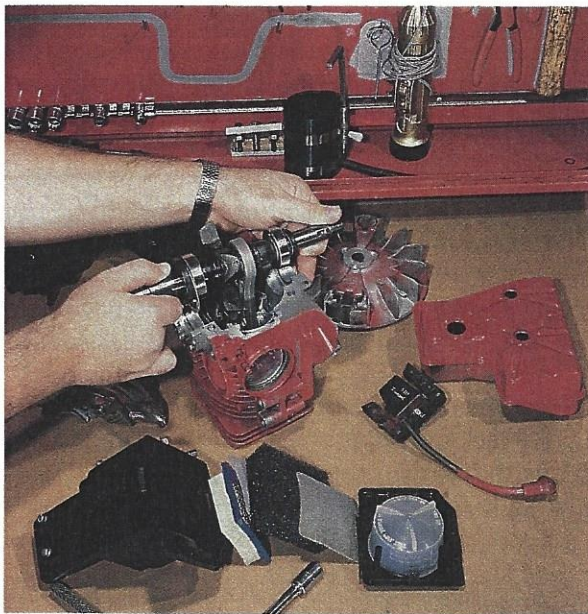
Crankshaft must be clean and carefully installed in crankcase. Tapered end fits into flywheel, which is secured with a key, lock washer, and nut. (Tecumseh)
